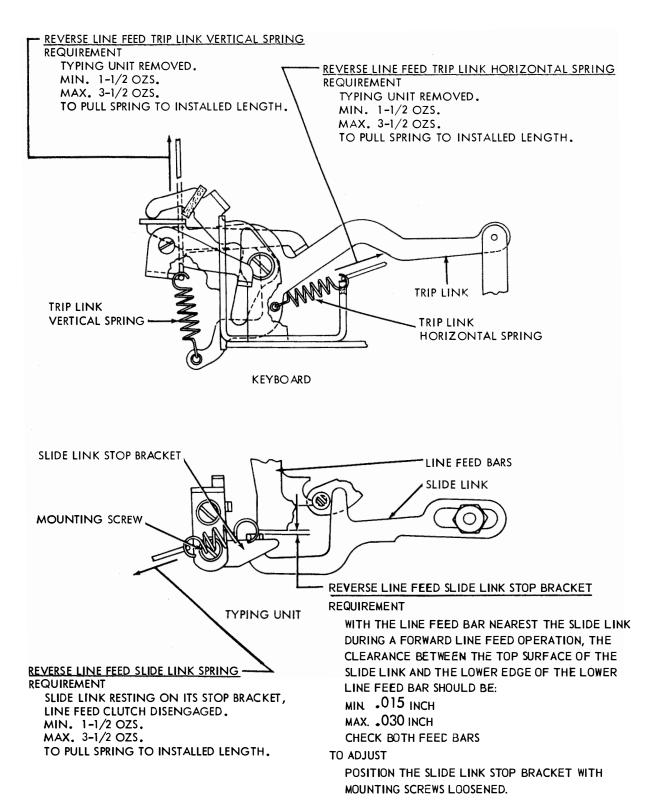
LOCAL REVERSE LINE FEED MECHANISM, LEFT VIEW
